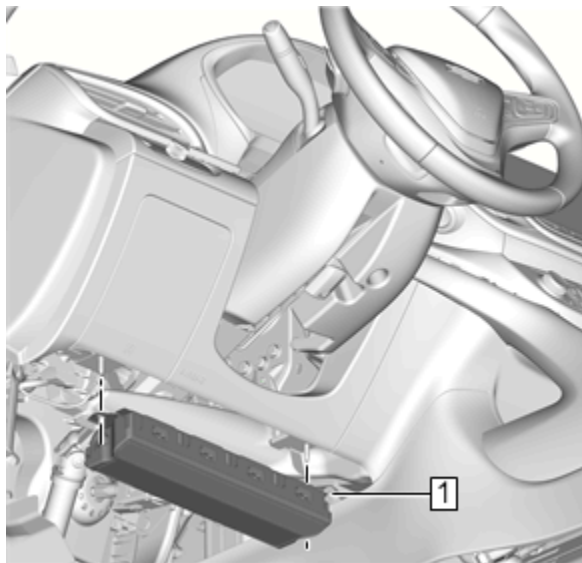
Instrument Panel Lower Airbag - Driver Side
